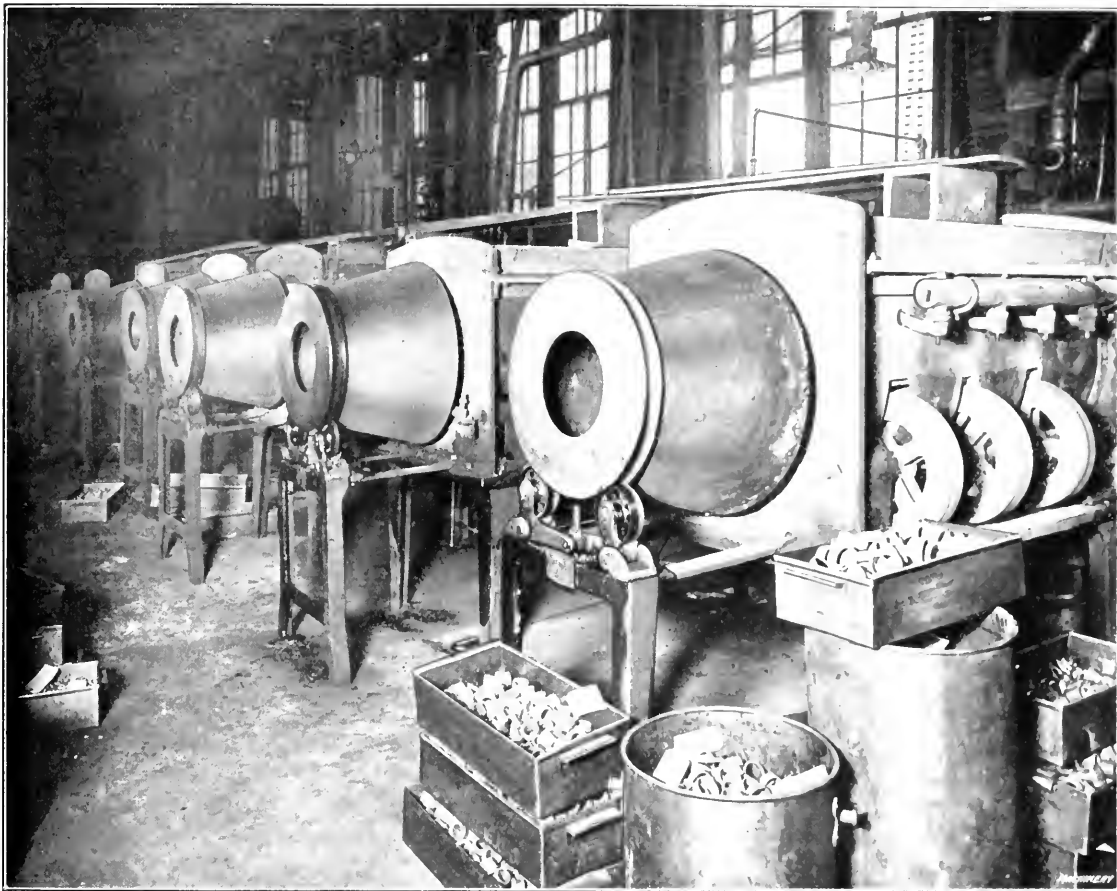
Rotary Furnaces used for drawing the Temper of Roller Bearing Parts
